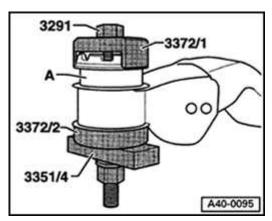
Pulling In Rear Bonded Rubber Mounting Courtesy of VOLKSWAGEN UNITED STATES, INC.
